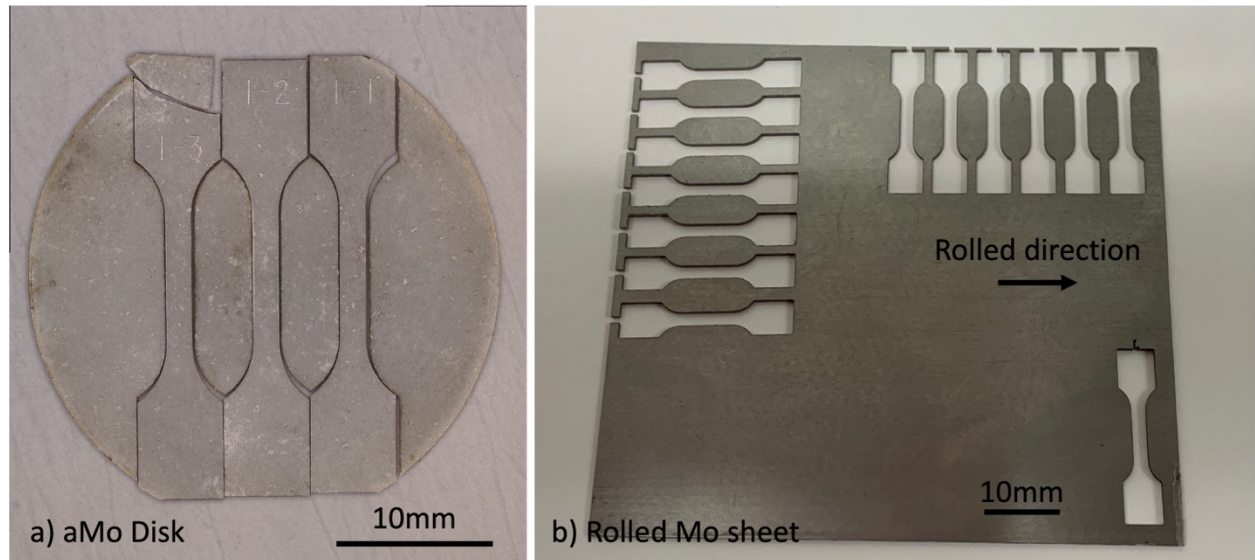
a) SS3 specimens machined from an aMo disk, b) Rolled Mo sheet showing locations of the machined SS3 specimens.
